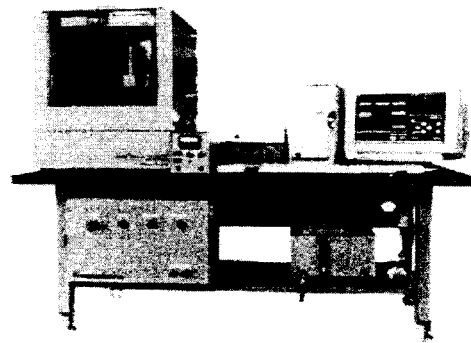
External view of Ultraprecision Micro-form Generating Machine
